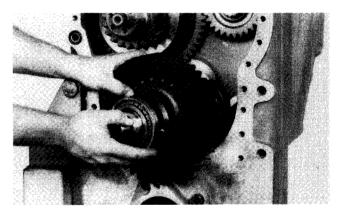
Install idler shaft assembly. NOTE: Lock ball in bearing cup.
